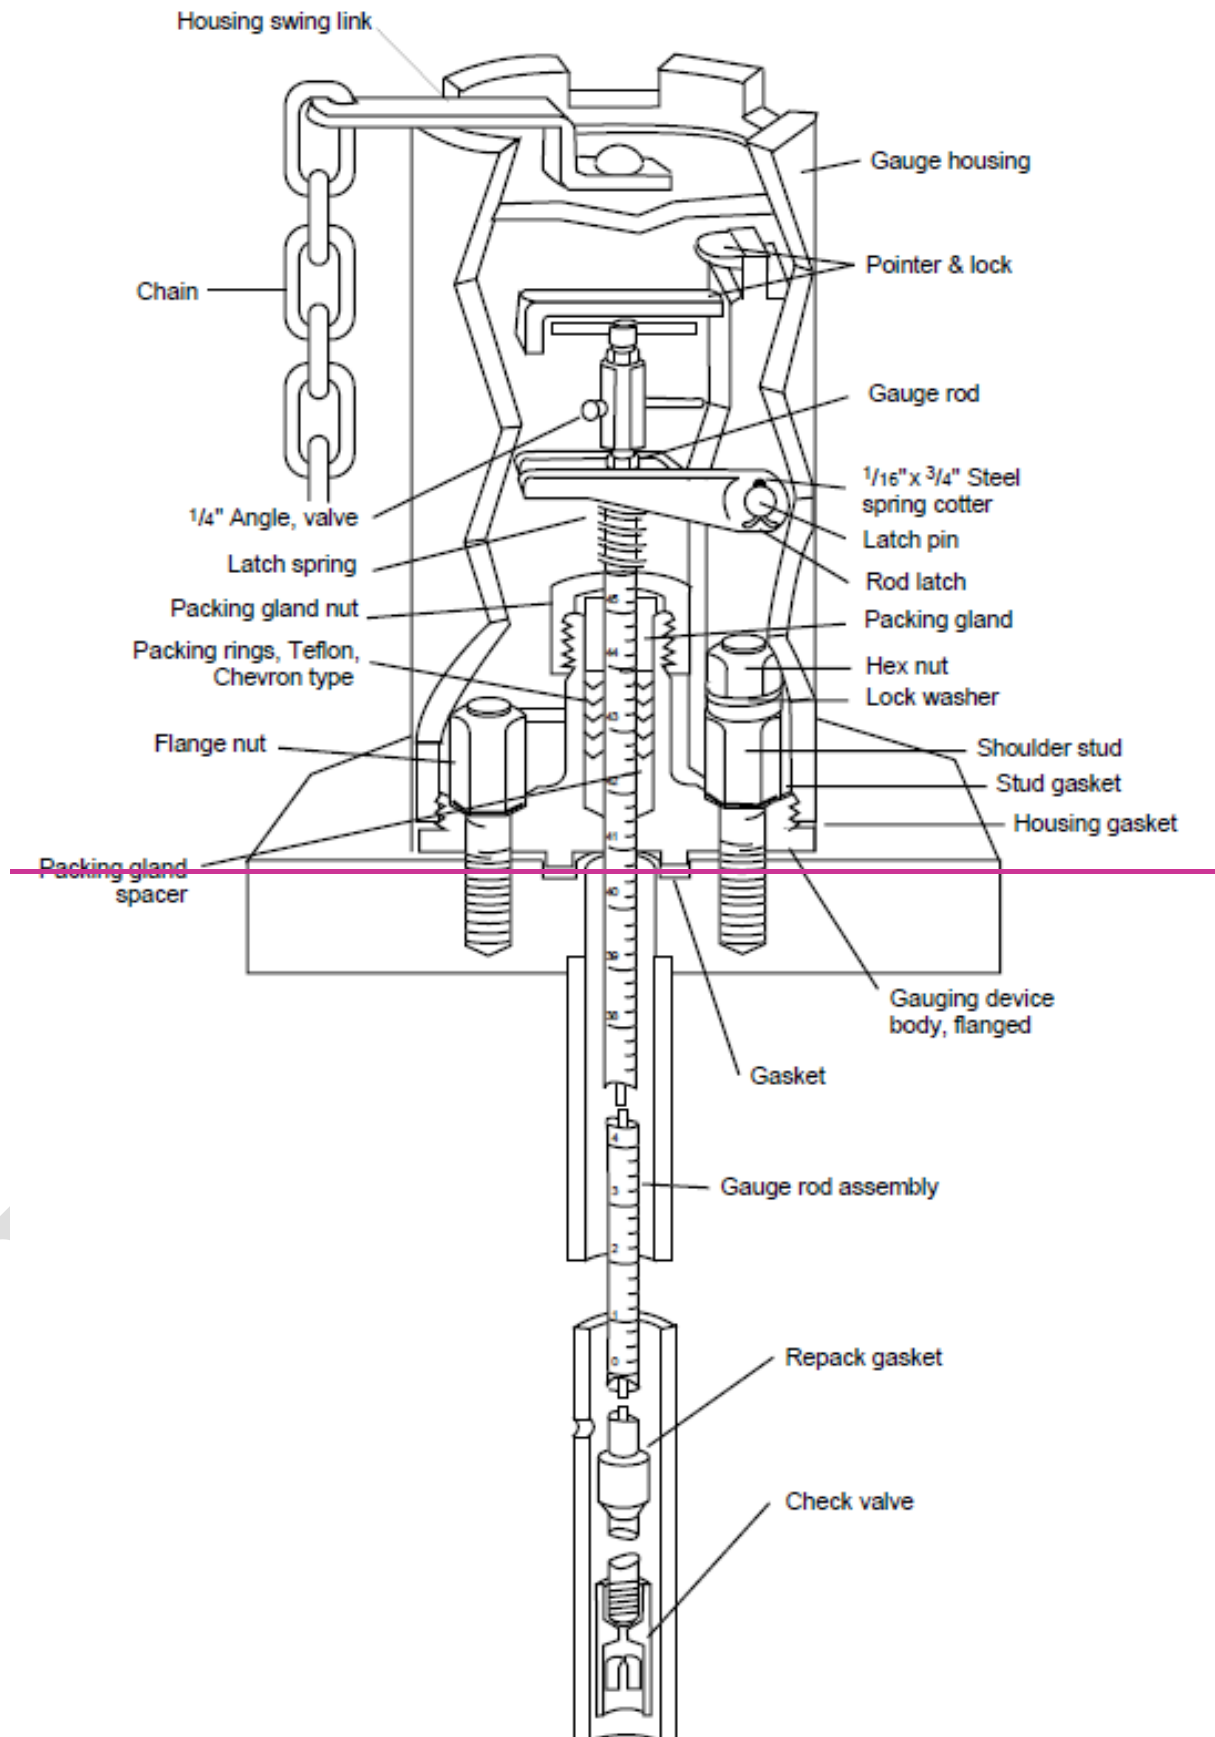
Slip-Tube Gauging Device Assembly for Compressed Gas
